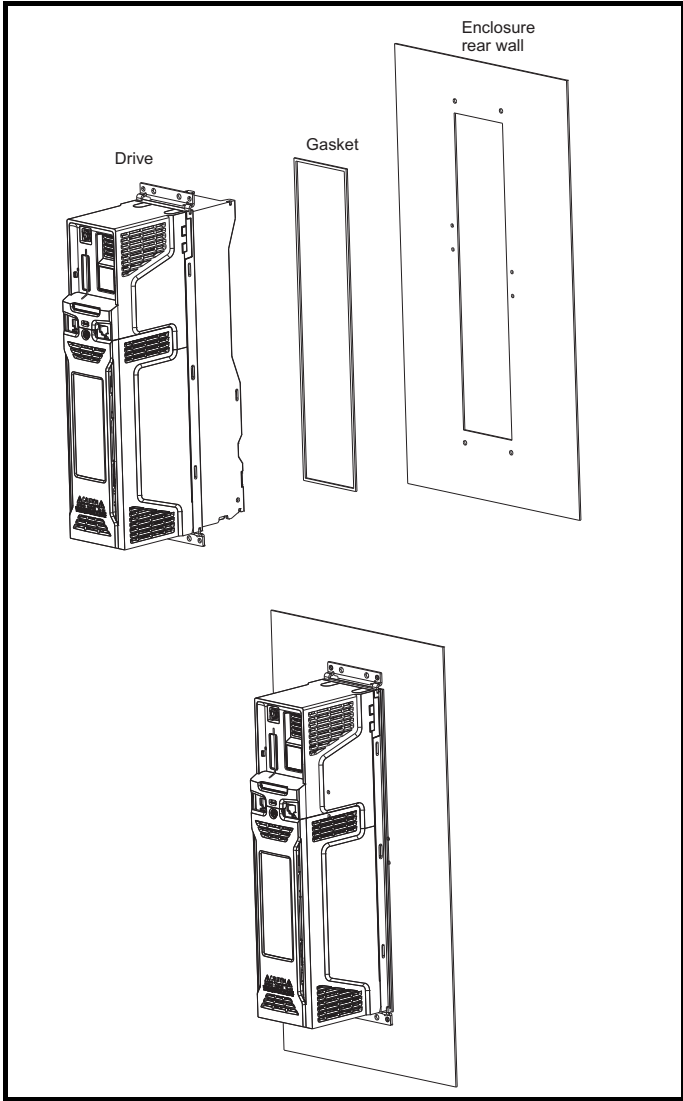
Example of IP65 (NEMA 12) through-panel layout
